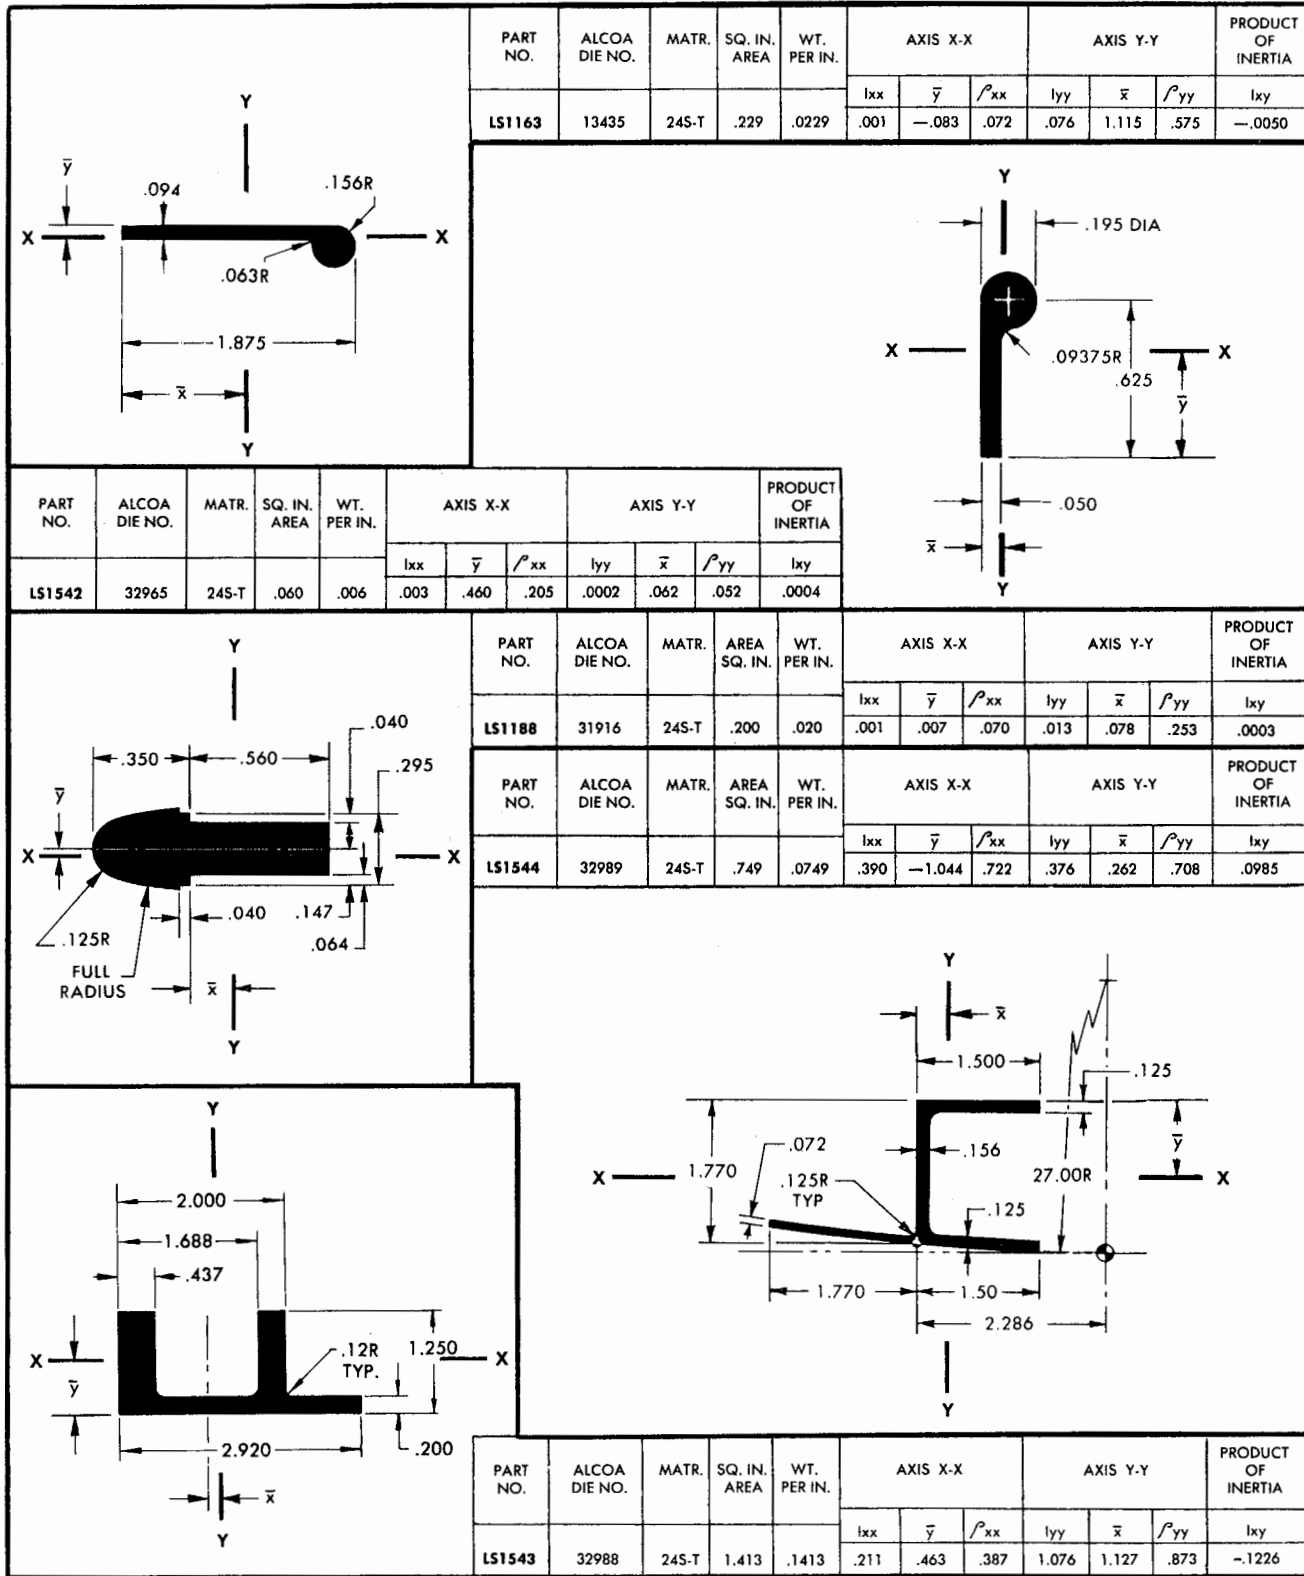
(Sheet 15 of 17 Sheets) — Extruded Standards
